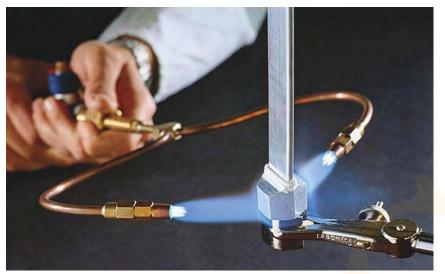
Unique torch tip that can apply flames completely around the periphery of the assembly being brazed to uniformly heat the entire joint.
